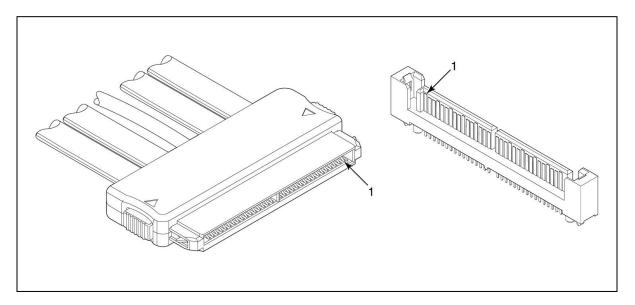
Isometric drawings of the internal 4 lane cable and connector
